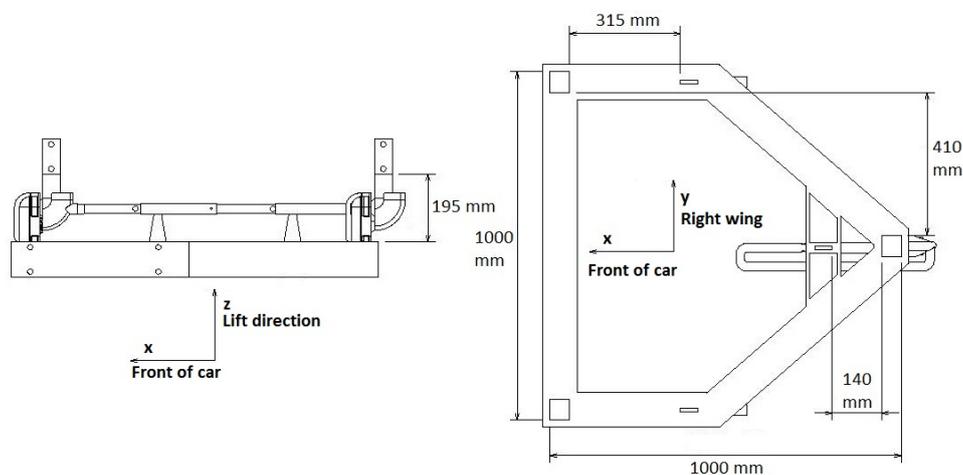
Left: Side view of the attachment system. Right: Bottom view of the attachment system
